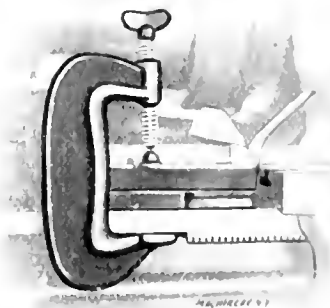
Iron Clamped on Ways of Lathe to make a Position Stop for Carriage.
